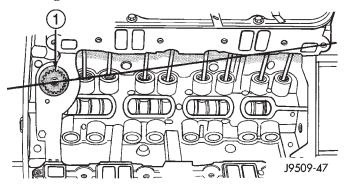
Position of Oil Pump Shaft Slot 1 – DISTRIBUTOR DRIVE
